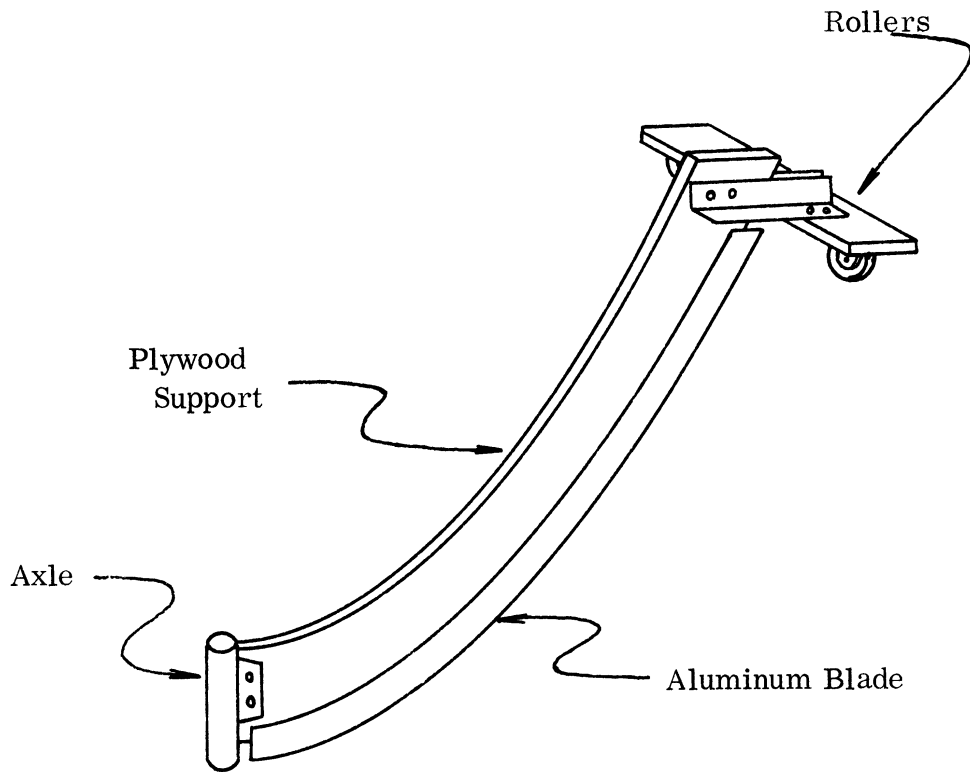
SHOWING SCRAPER BLADE ASSEMBLY.
